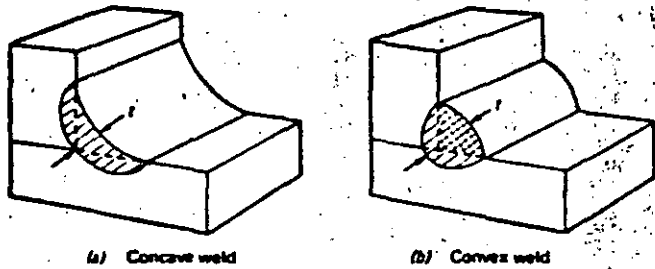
The leg size and the surface of a concave fillet weld (a) may be larger than that of a convex bead (b), but its throat, t , may be considerably smaller.
